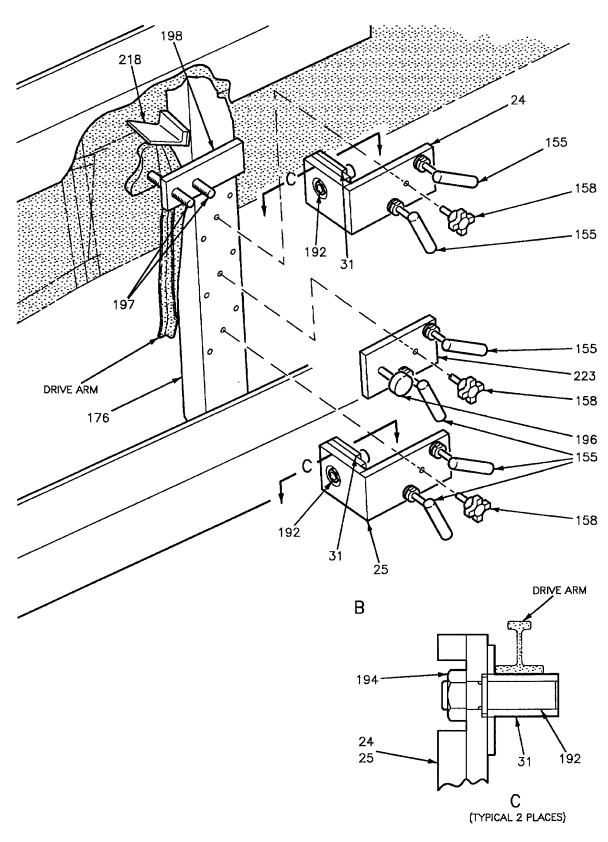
Inboard Drive Arm, 74A180728 (Sheet 3)
